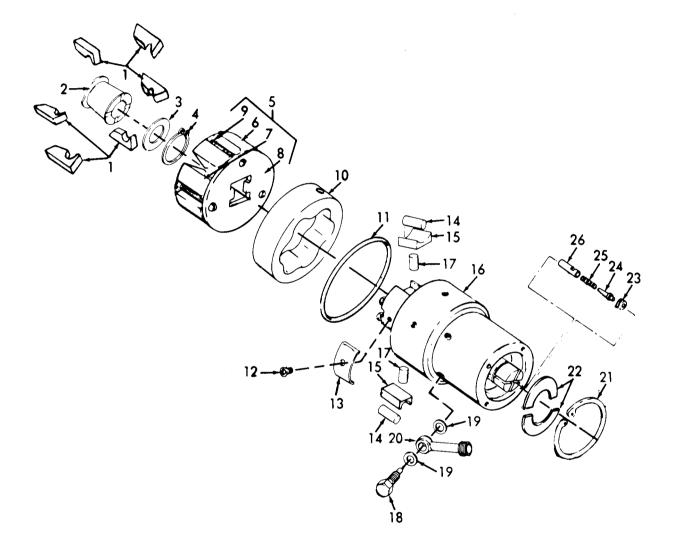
Fuel Injection Pump Rotor Assembly.
